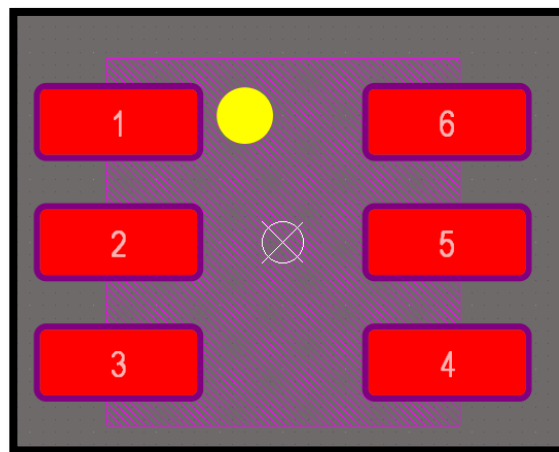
The PCB Footprint for the LTC6994IS6-2#TRMPBF_1
